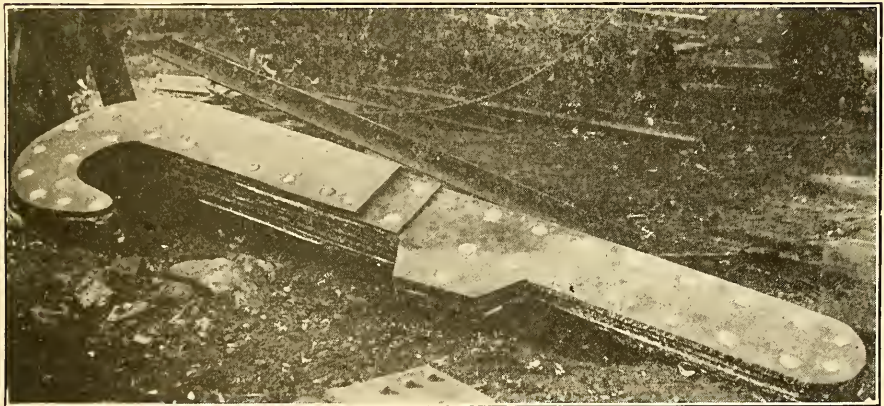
Ladle Hook Made of Torch-Cut Plates.
